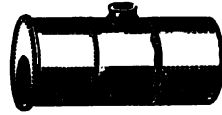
Explosion of Cornish boiler from external corrosion.
